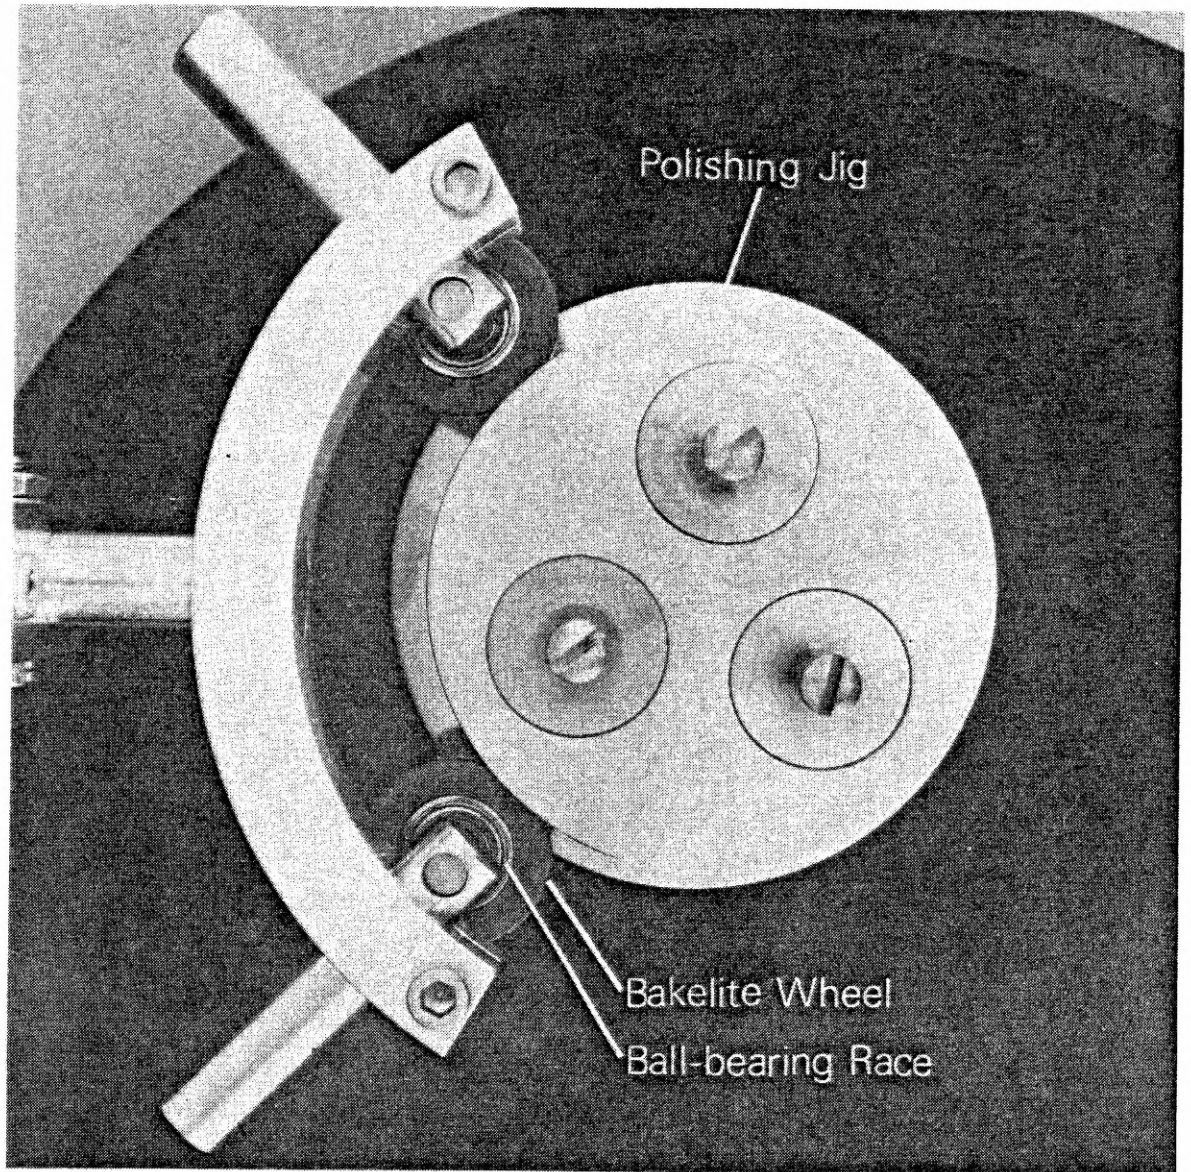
Close-up of idler assembly. The polishing jig is frictionally driven against two bakelite wheels mounted onto ball-bearing races.
